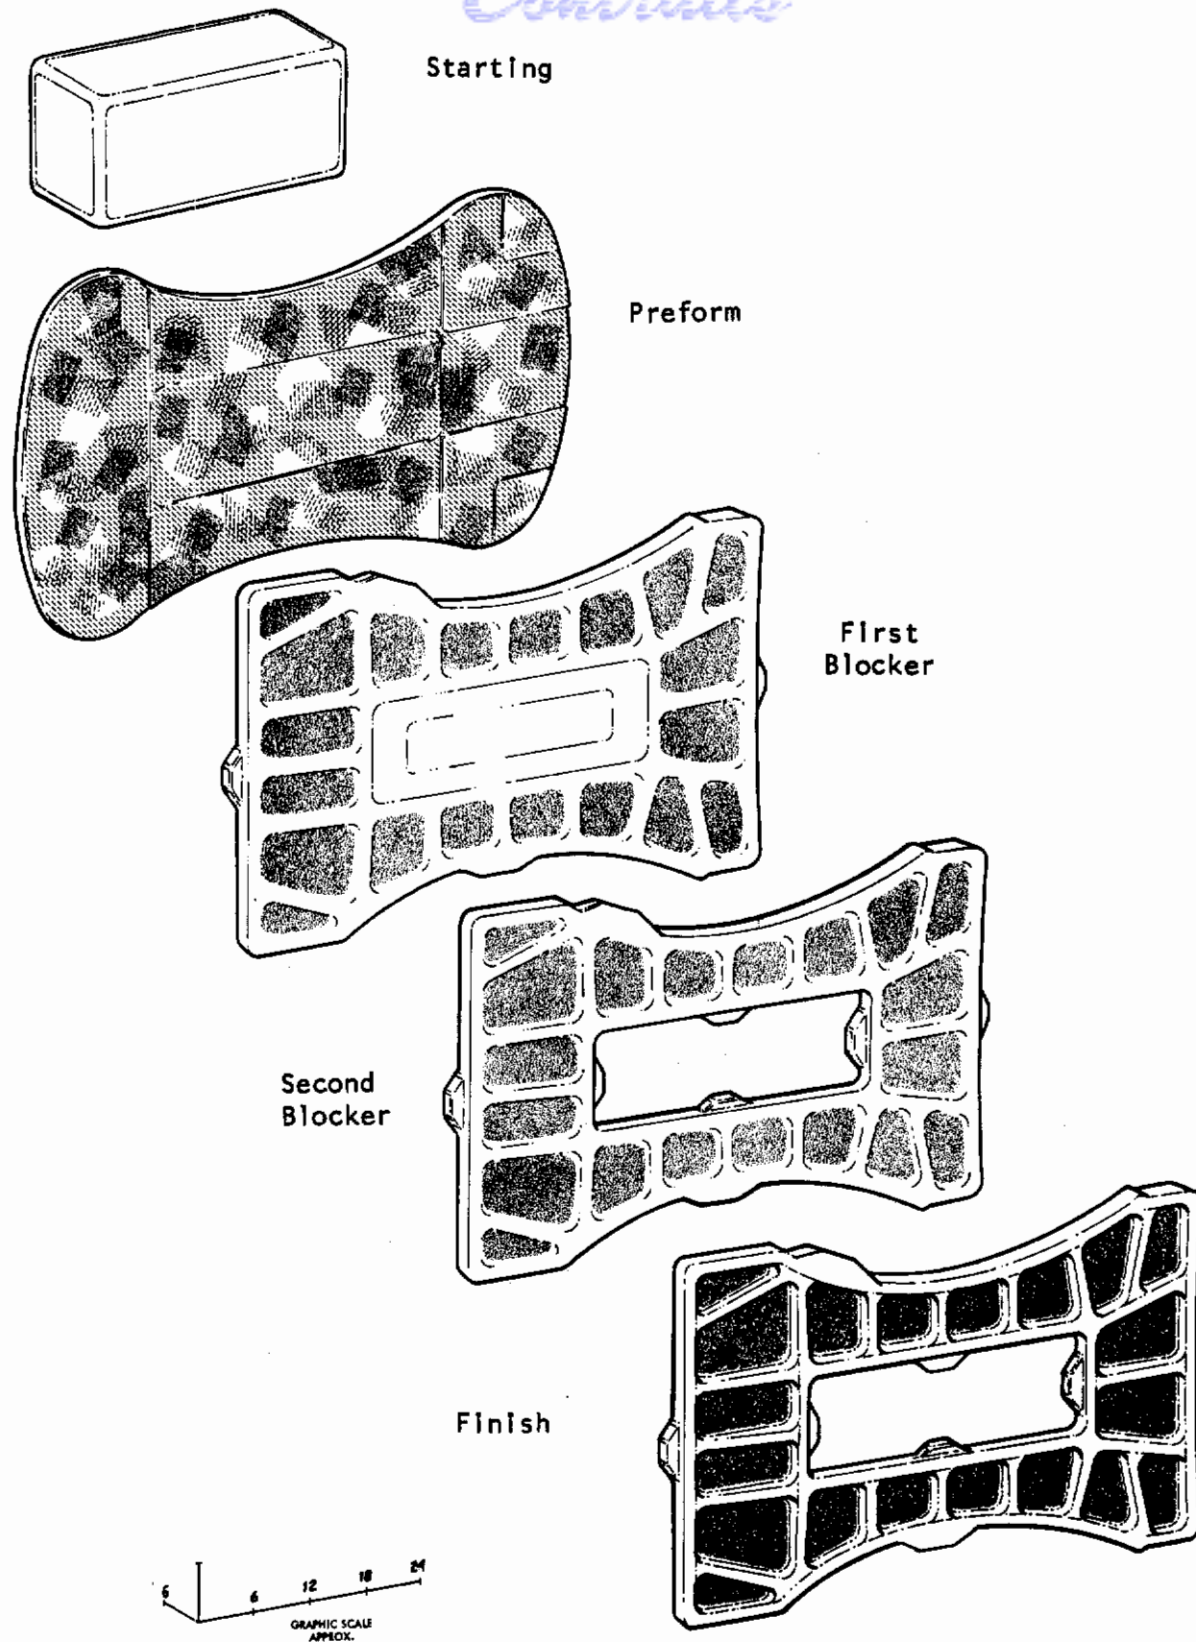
Illustration of Bulkhead Forging Staging Sequence Employed During Forging Efforts with 50,000 Ton Hydraulic Press (First Blocker Through Finish).
